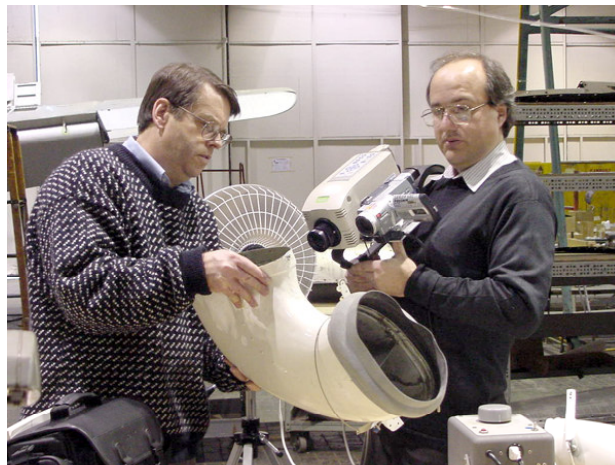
Operator viewing welded duct from Bearcat in real time
